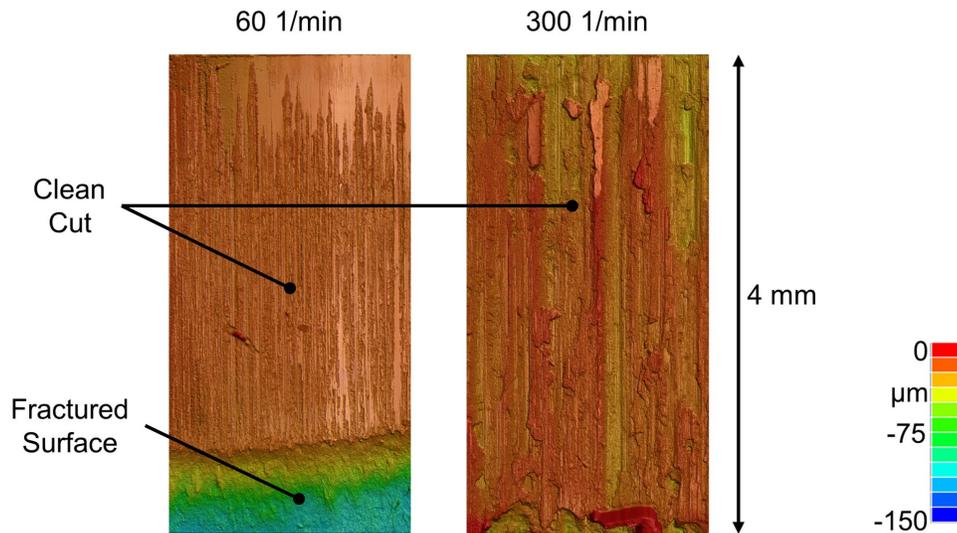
Cutting surfaces of parts cut with 60 Strokes per minute (left) and 300 strokes per minute (right)
